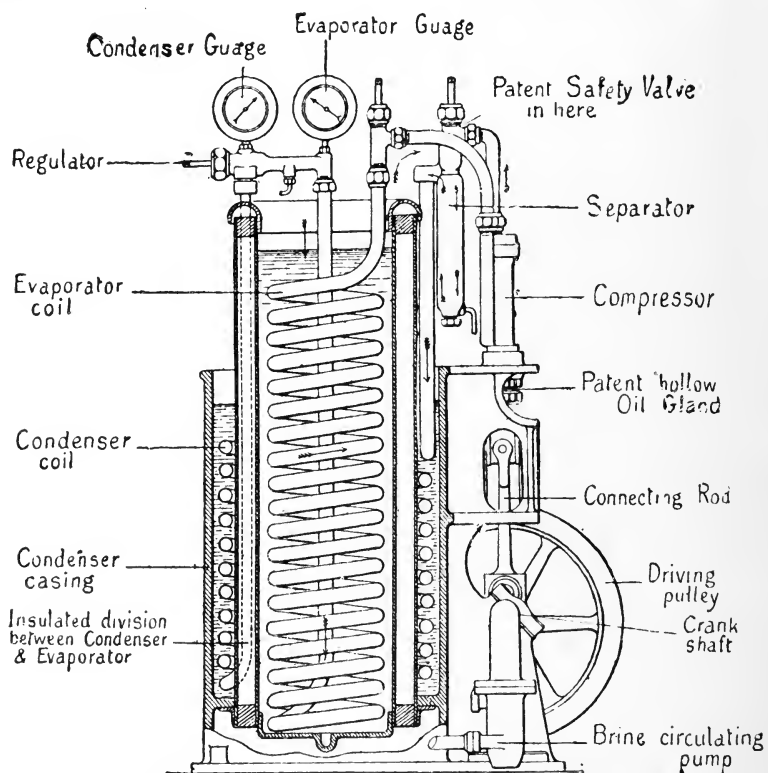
Diagram illustrating construction of Hall's Land Type Machine.
